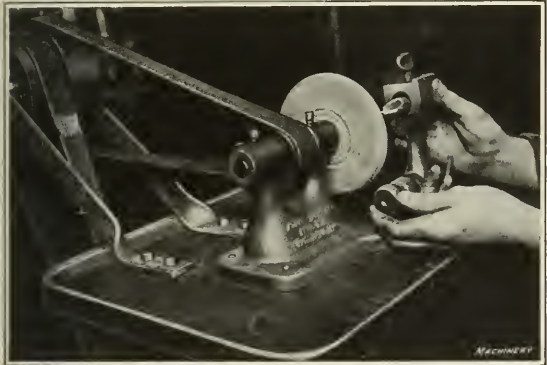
Punch Grinding Machine in Operation, showing Micrometer Adjustment
